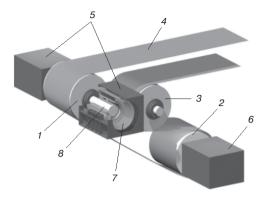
The layout of a 2-drum gearless drive belt conveyor equipped with synchronous motors:
